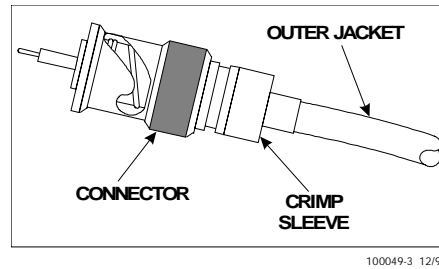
Install Crimp Sleeve (Single-Fiber Cable)
